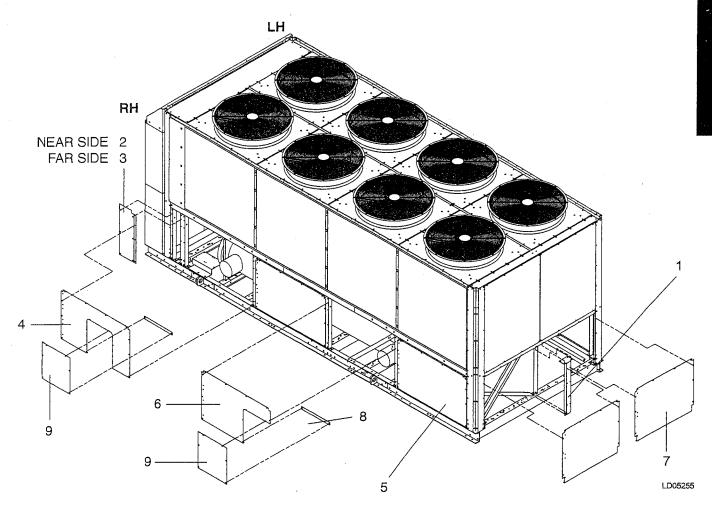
BOTTOM SECTION - LOUVERED ENCLOSURE - KIT NO. 375-29571-161 IS SHOWN.
